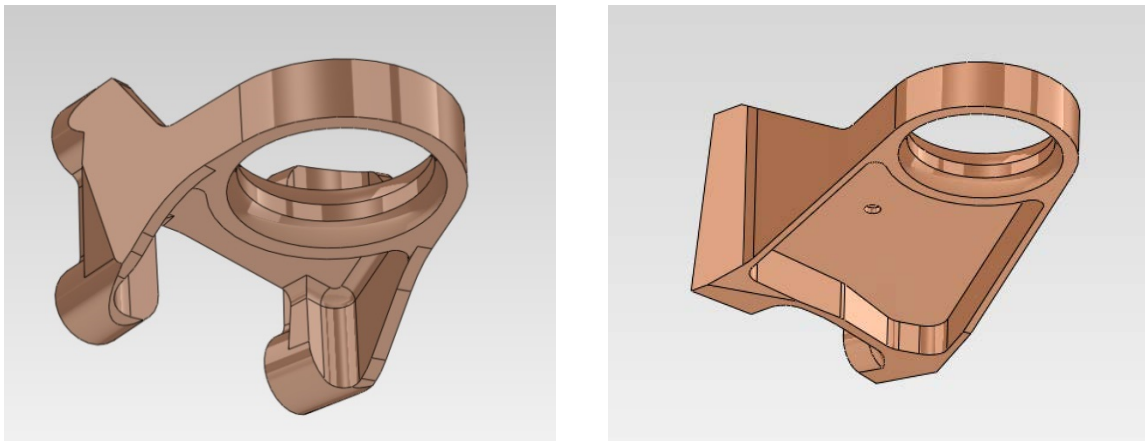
CAD Models of Top (left) and Bottom (right) OEM Guide Tube Bearing Brackets
